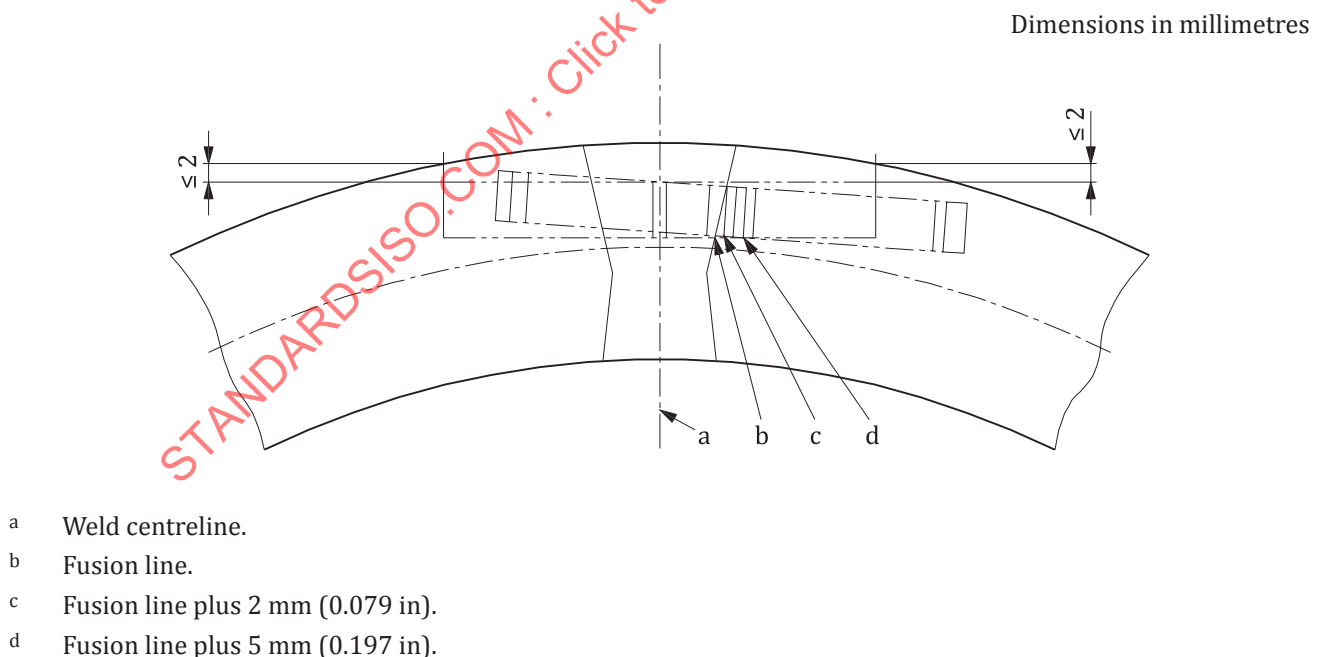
Location of Charpy V-notch test pieces in the weld region of SAW pipe
